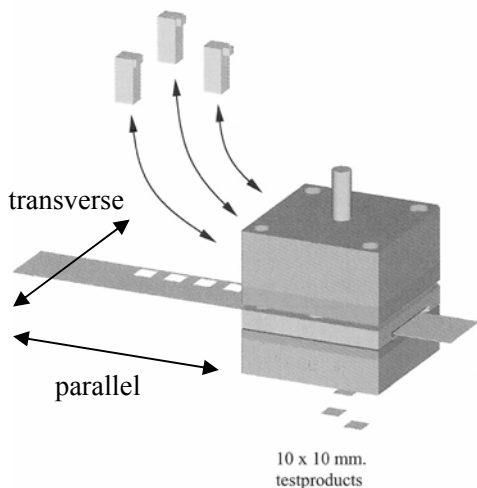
The tool to cut test samples from strip, and the definition of parallel and transverse as measurement orientation.
